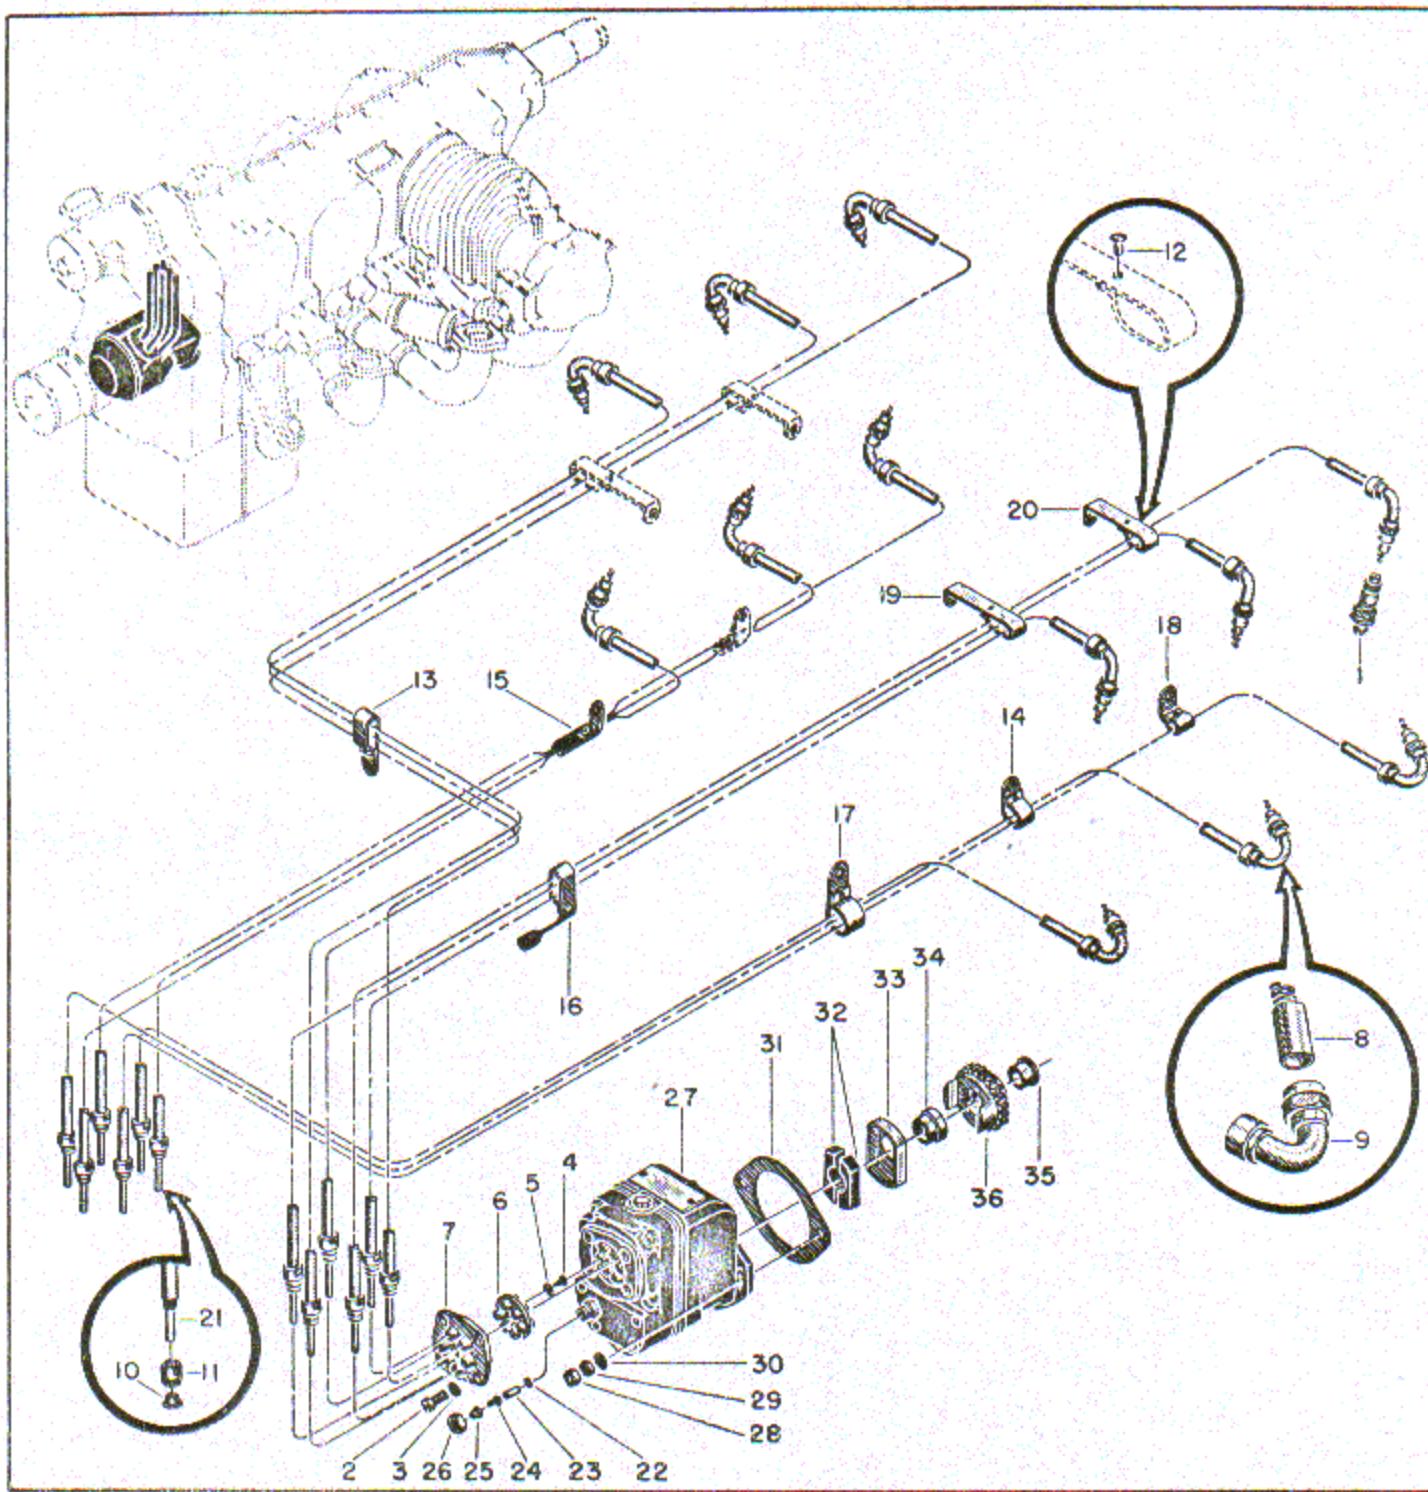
Exploded Parts View of O-470-7 Scintilla Ignition System
